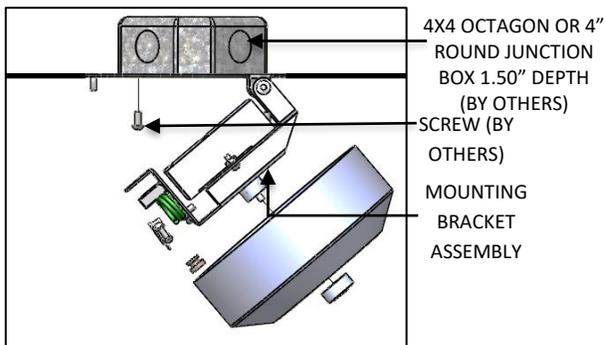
MOUNTING BRACKET ASSEMBLY INSTALLATION
